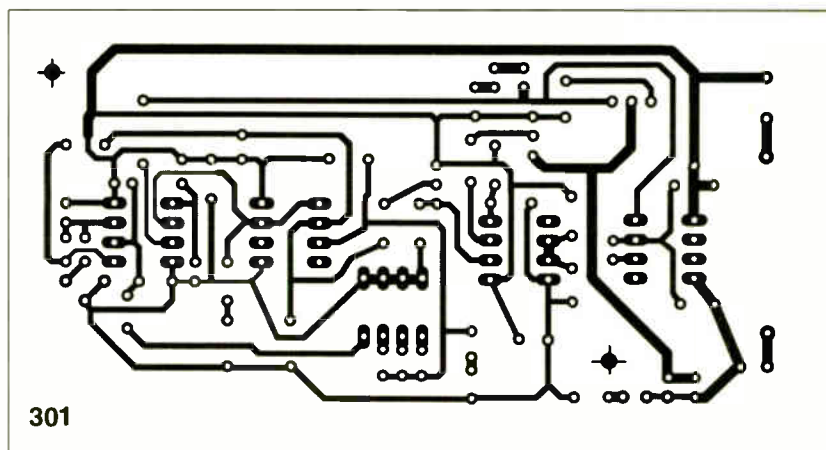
Printed circuit board topside component layout, interwiring and full-size underside copper master pattern for the Hosepipe Controller.
